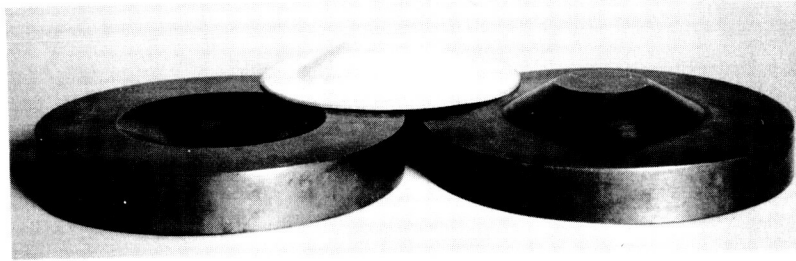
Valve Diaphragm Forming Tool Shown with Formed Laminated Composite
